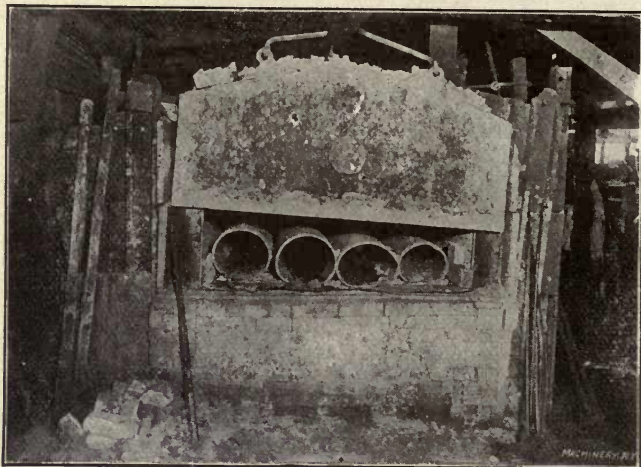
One of the Annealing Furnaces, showing the Pipes into which the Tool-steel Bars are placed while being heated for annealing
